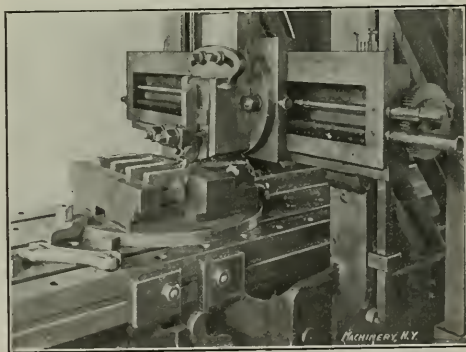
The Tool in Position Ready for the Roughing Cut.
